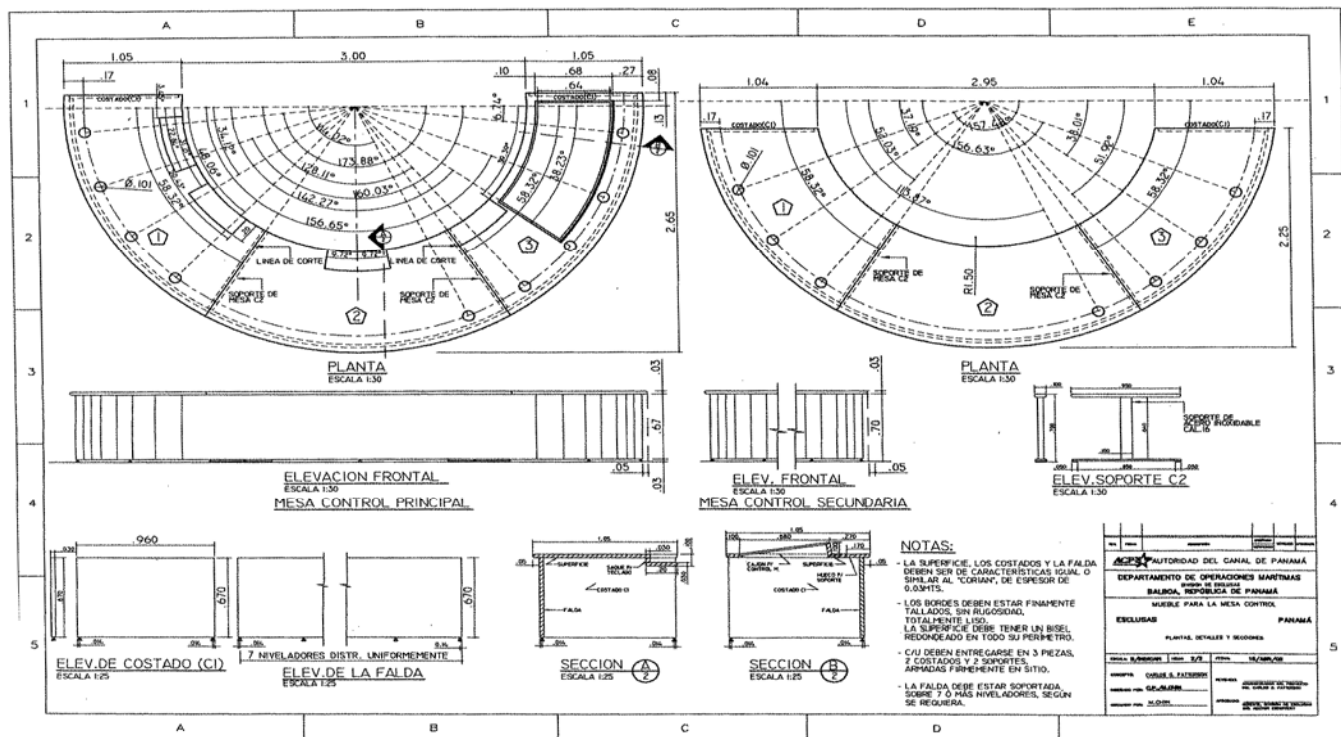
59 83-1: Elevations and Plan Views of Existing Consoles
